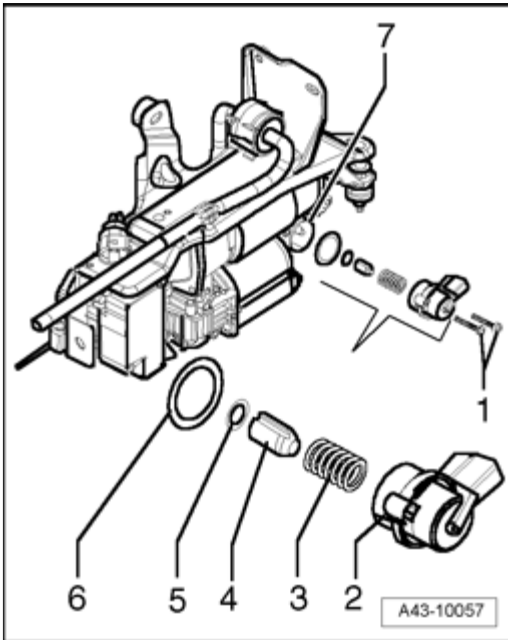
Identifying Electrical Harness Connector, Level Control System Solenoid, O-Rings And Threaded Connections
